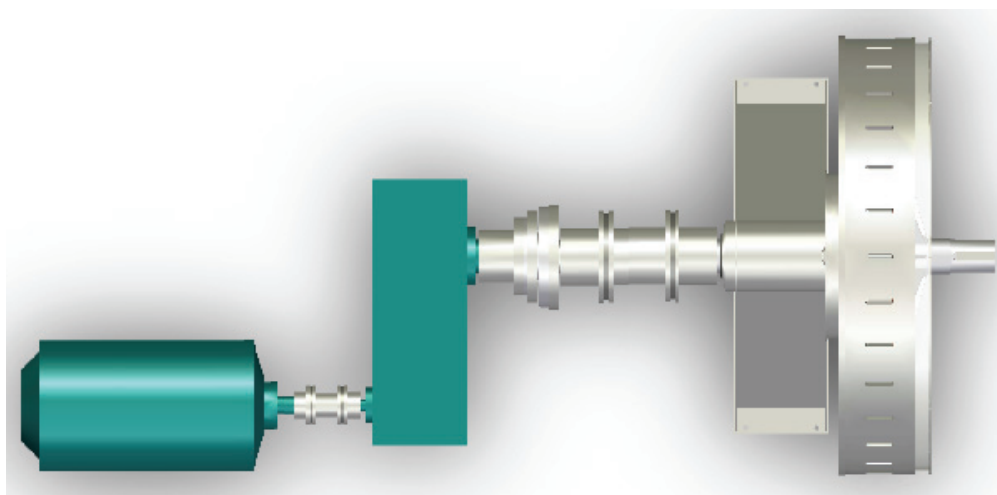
Machine setup; induction motor, gear, torque meter and PM-generator
